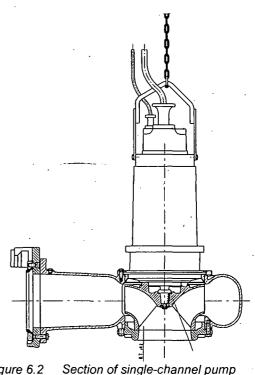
Section of single-channel pump showing impeller clearance at suction opening.
